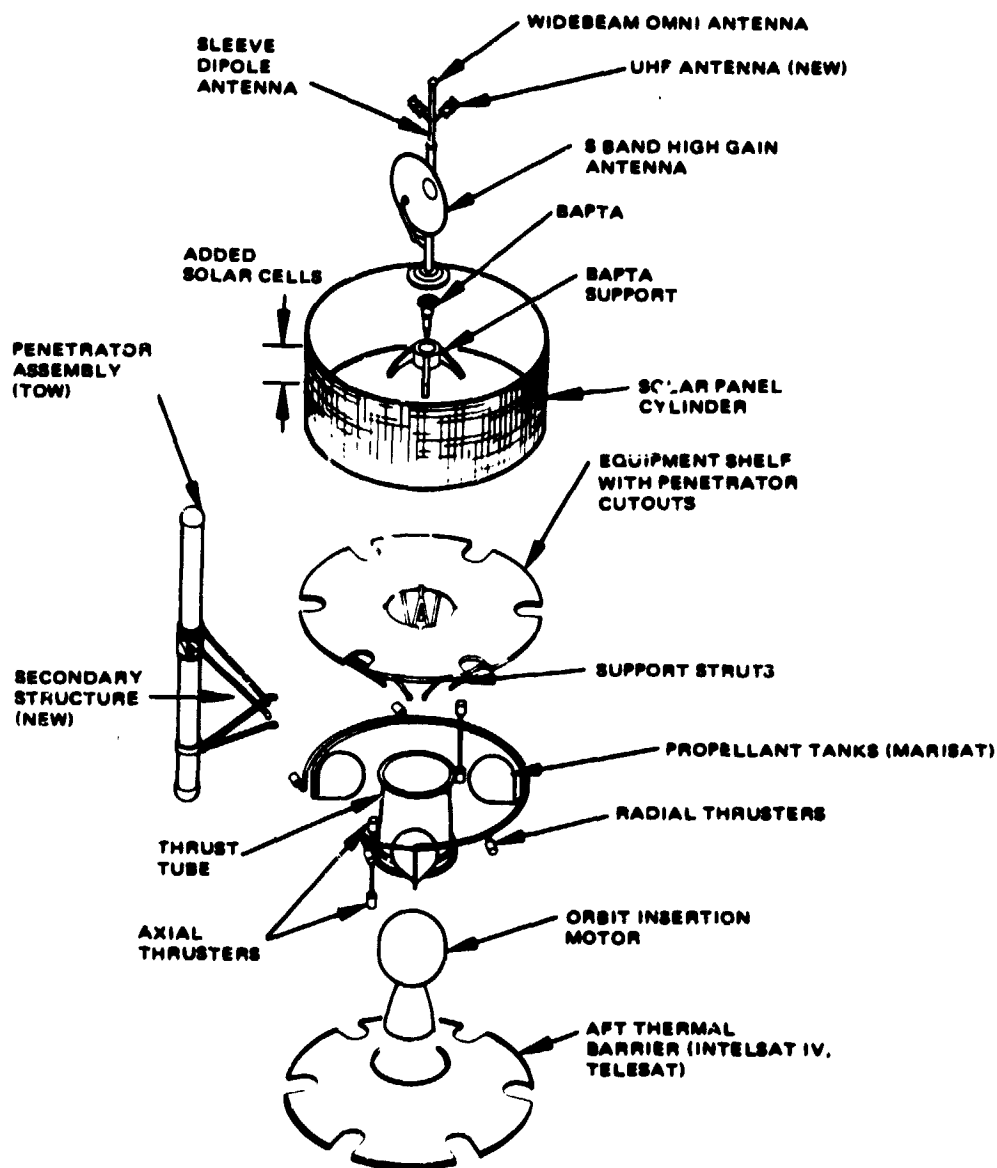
EXPLODED VIEW OF PMO WITH PENETRATORS
